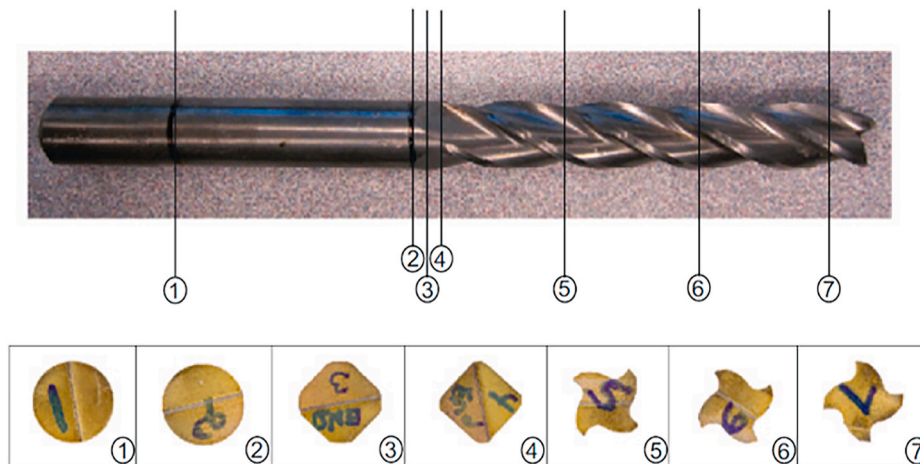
Cross-sections of carbide endmill prepared using electrical discharge machining (EDM). The MATLAB image processing toolbox was used to identify the image boundary (periphery) and points were extracted to define the cross-section [43].
